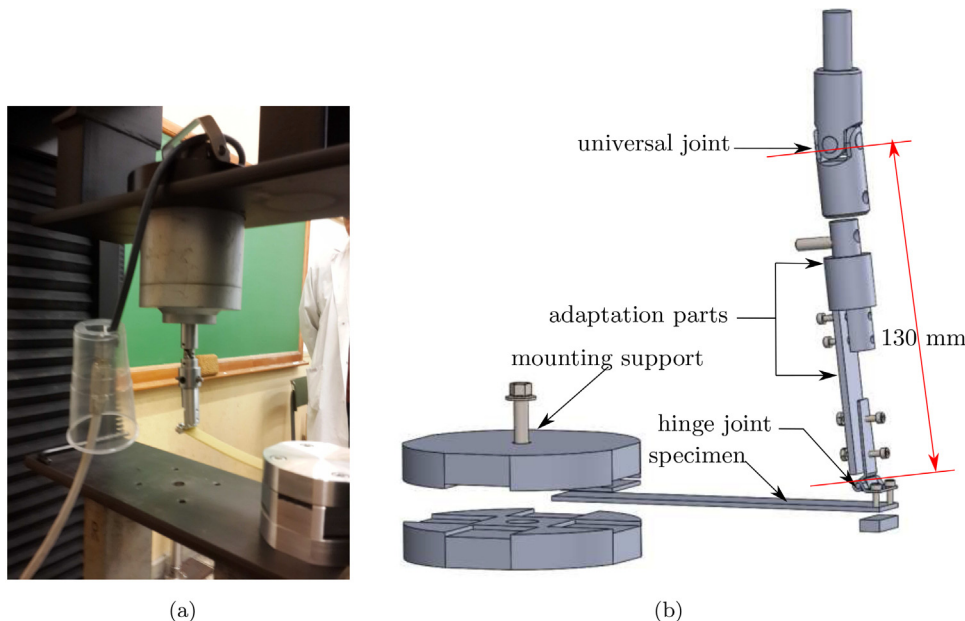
Uniaxial bending prototype: (a) Real view, (b) Exploded view.
